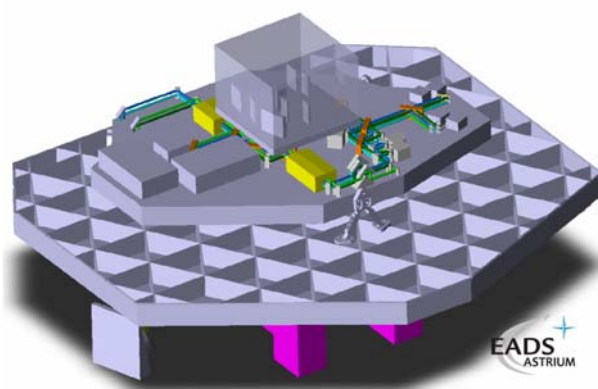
Optical assembly of the BCS payload consisting of the receive optical assembly (at bottom level), the nulling optical assembly (at intermediate level) and the detection optical assembly (at top level).
